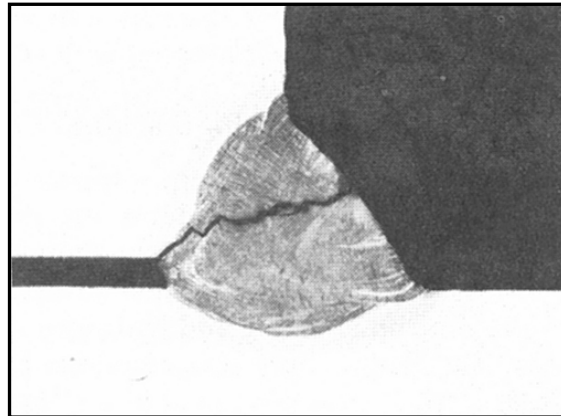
Example of Fillet Weld Root Crack
